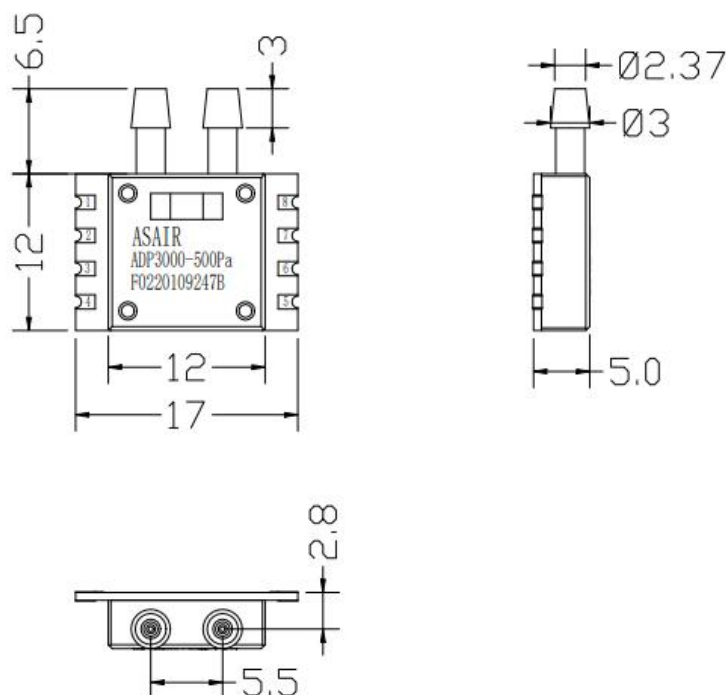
ADP3000 Outline Dimensions (Unit: mm , Unmarked Tolerance: $\pm 0.2\text{ mm}$)
